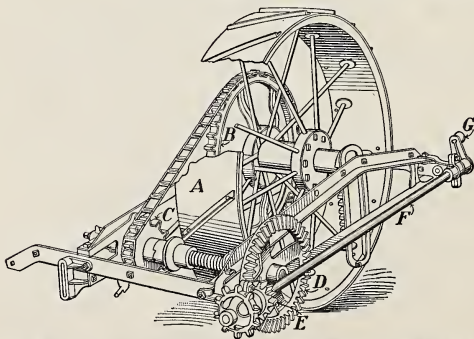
The driving part of a self-binder. The driving-wheel *A* is drawn forward by the horses. On its axis is the sprocket-wheel *B*, and this, by means of the chain, drives the sprocket-wheel *C*. The latter drives the cog-wheel *D* which, again, drives the cog-wheel *E*, and this causes the shaft *F* with the crank *G* on its end to rotate.
